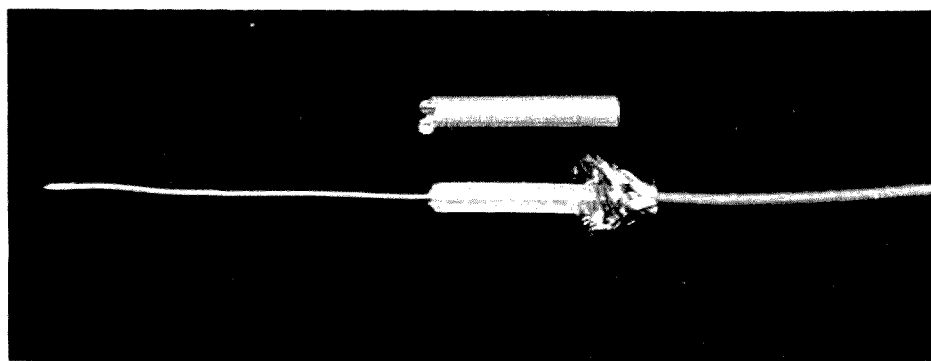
Photo B. Coaxial coupling cable and mounting ferrule before assembly.
